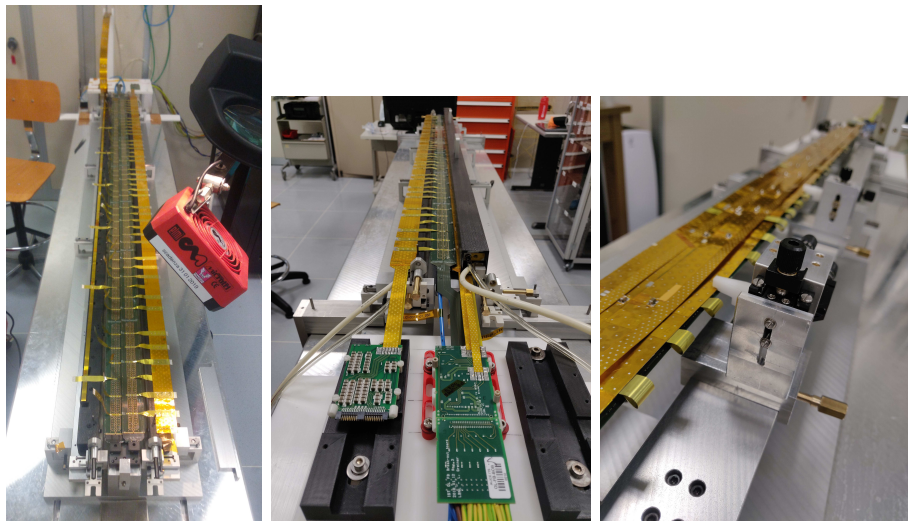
The left photo shows a stave on the folding jig with the power and bias bus distributions ships ready for soldering on the handling bars. The upper PB is rolled out to allow the soldering of the BB to the corresponding HIC cross cables. Once the BB is soldered, the PB is lowered to be soldered to the remaining cross cables. The center figure shows a PB+BB assembly rotated and inserted into the U-arms of the upper half stave (keep in mind that the HS is upside-down in this position) with the filter board connected to the break-out board from the power board. In this position the HS is tested to make sure no bonds were damaged by the folding procedure. The carbon fiber handling bar is removed if the test is successful. The right photo shows the two PB+BB systems folded and the insertion of the remaining (smaller) U-arms to lock the busses into position.
